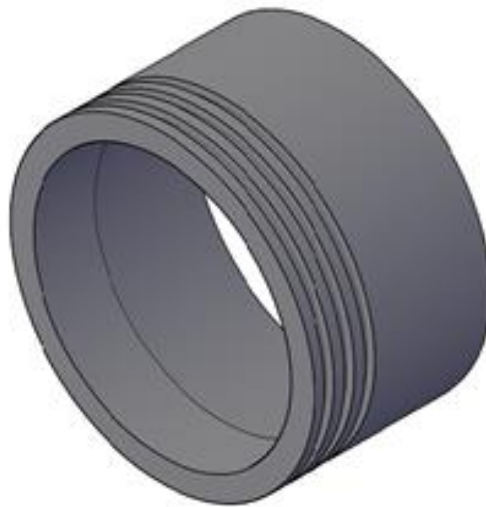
Model IV : Embedded electrode assembly – Isometric view
